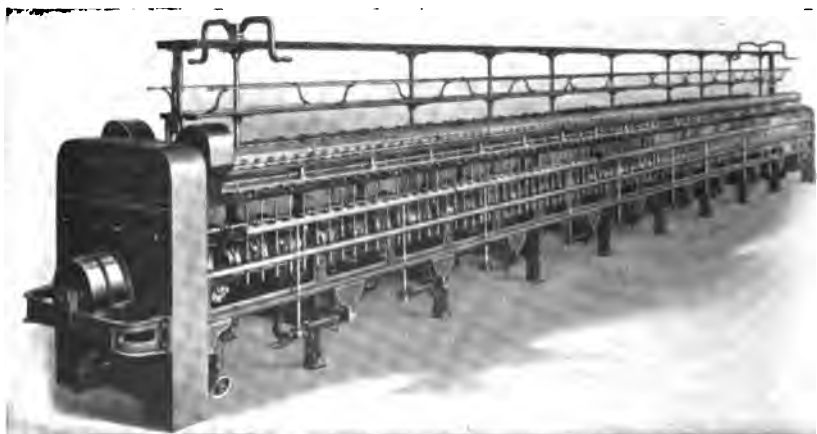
SEC. 10rr.— Ring spinning frame, with tape-driven spindles.
